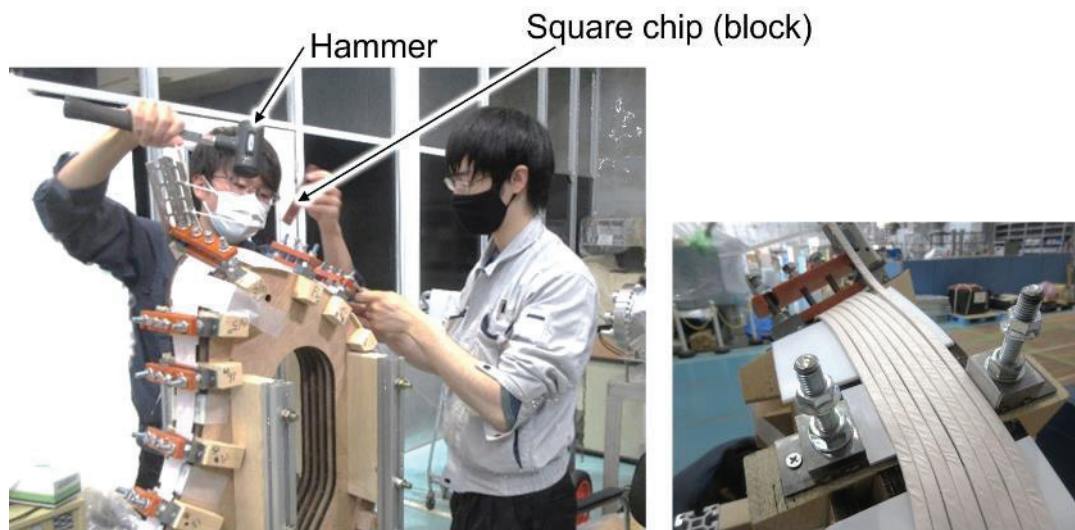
Conductor bending and twisting methods for the TFC. A general coil bends the conductor using a technique called tension winding, which is a winding method in which the winding bobbin is rotated while the conductor is pulled. This method cannot be applied to the TFC in the CFQS. When winding with a solid conductor, it is also necessary to twist the conductor. We forcibly twisted while bending the conductor by hammering.
